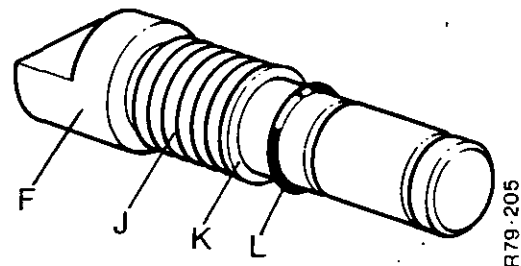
ASSEMBLY OF THE LOCKING LATCH
